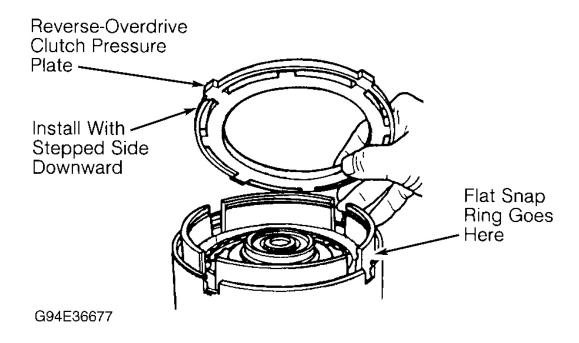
Installing Overdrive Clutch Plates & Discs Courtesy of CHRYSLER LLC
